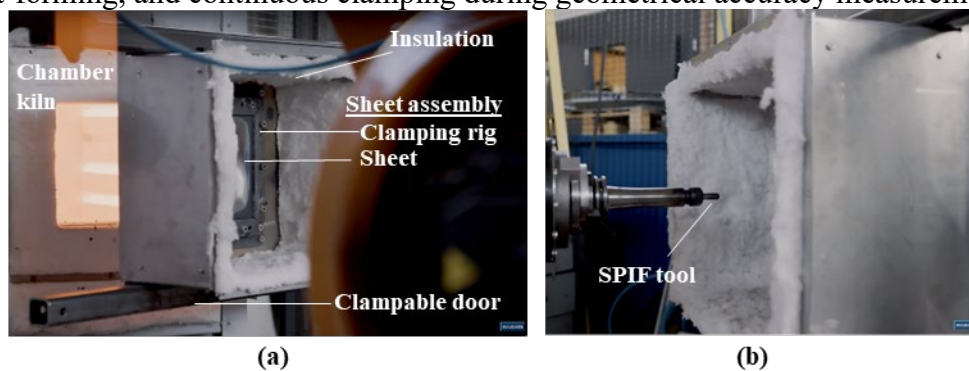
Configuration of the heat-assisted SPIF setup (a) pre-clamping stage, (b) forming stage after clamping.
